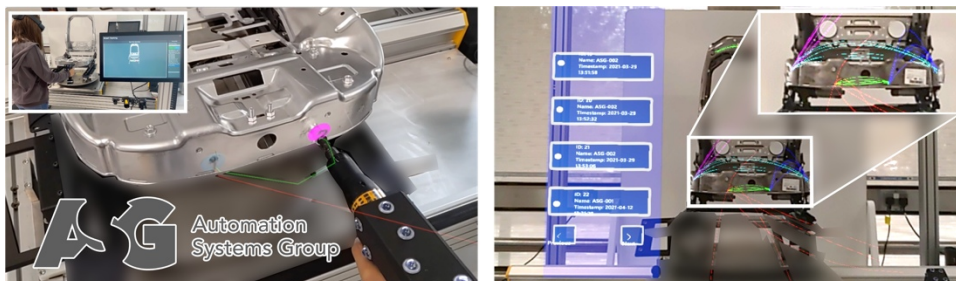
Left: HoloLens view of the second assembly process step, with the target tooltip position displayed as a magenta disc in the AR layer. Right: AR HoloLens view of tool paths for 6 cycles (historical data display).
